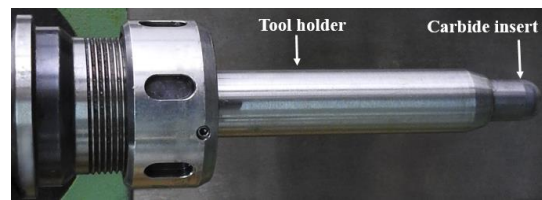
Spherical-head tool made of tungsten carbide, mounted on the blank holder and spindle
